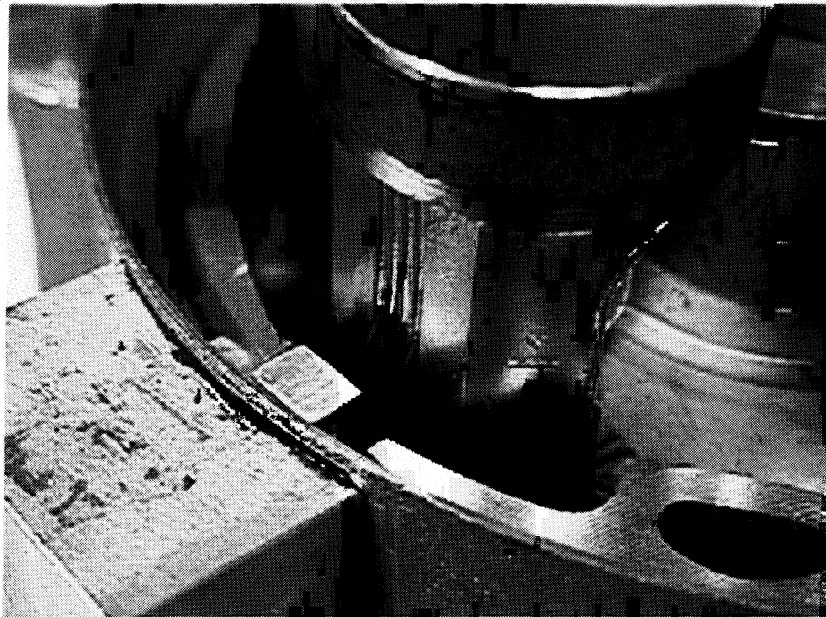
Picture of brush assembly mounted in the half opened compressor
